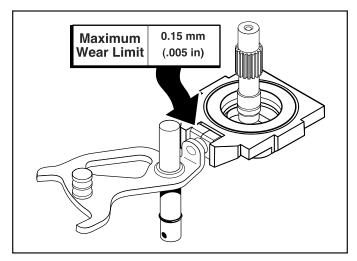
, Shift Blocks Clearance Tolerance
